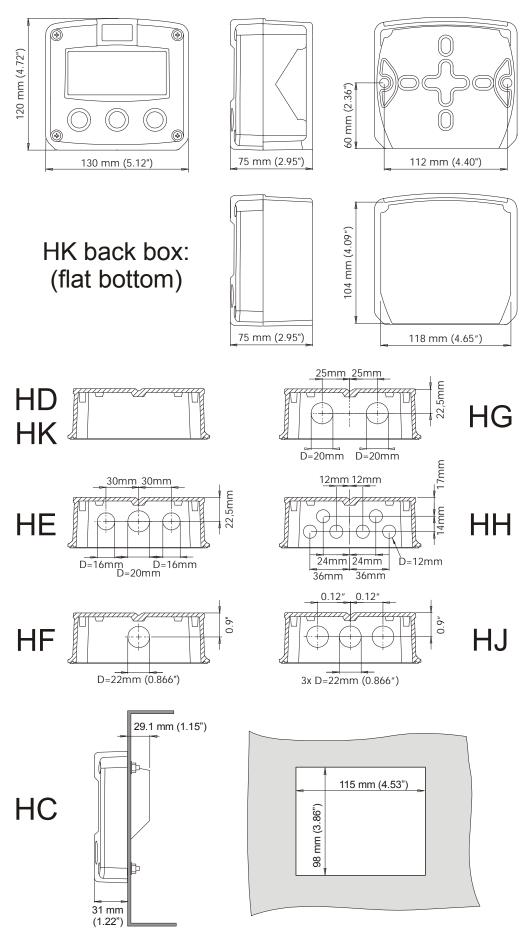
Dimensions GRP enclosures. HF113PEN_v0501_05
